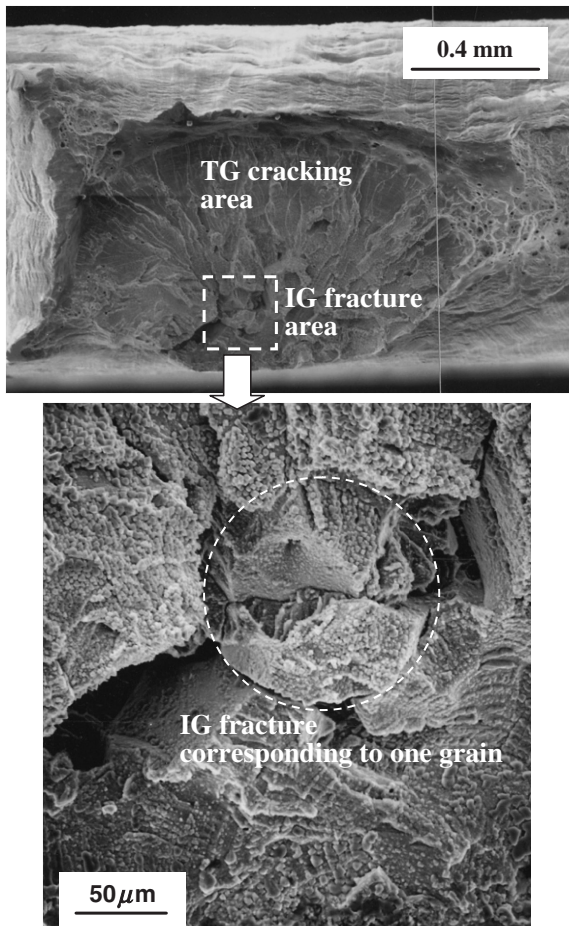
Fractographic appearances of the $1.1 \times 10^{20} n/cm^2$ specimen in water, consisting of a small amount of IG fracture area surrounded by TG cracking
